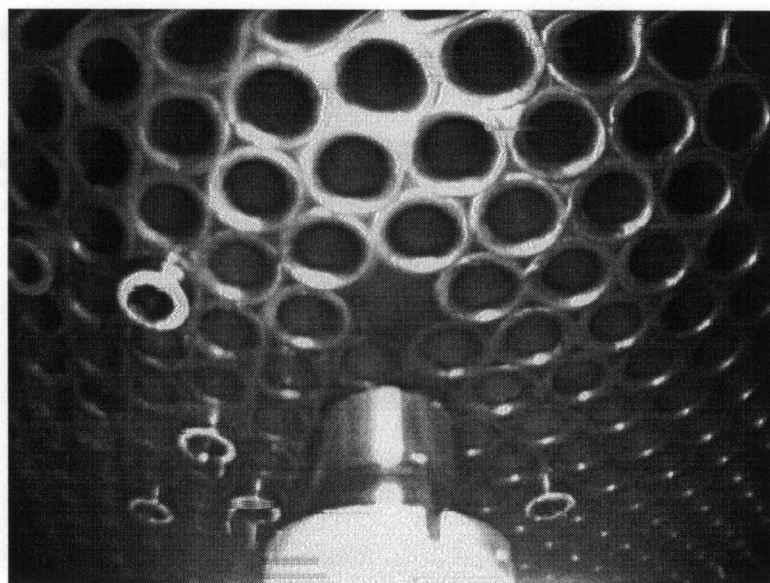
Triangular-Pitch, Flush-Welded Tubesheet
